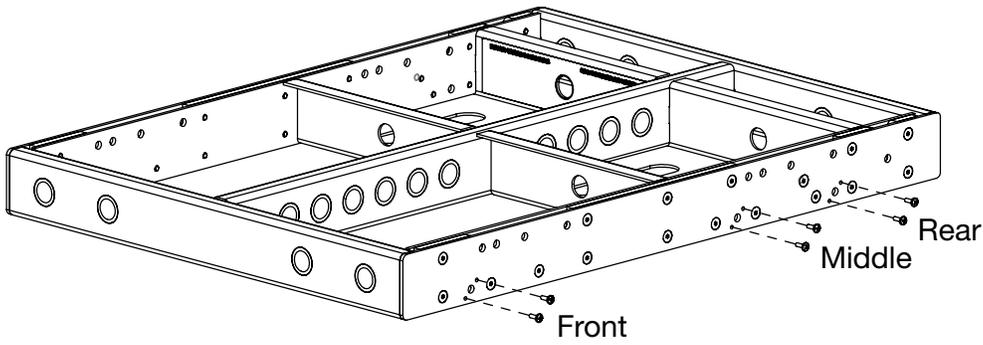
Blanking Screws (6 per side) to Prevent Corrosion at Unused Pin Locations for Ultra Weather Protection Grid
